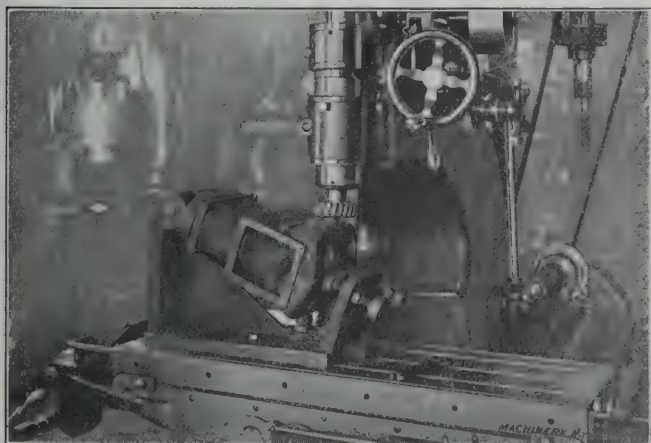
Fixture for Holding Cylinder while facing Exhaust Pipe Flange Bosses
